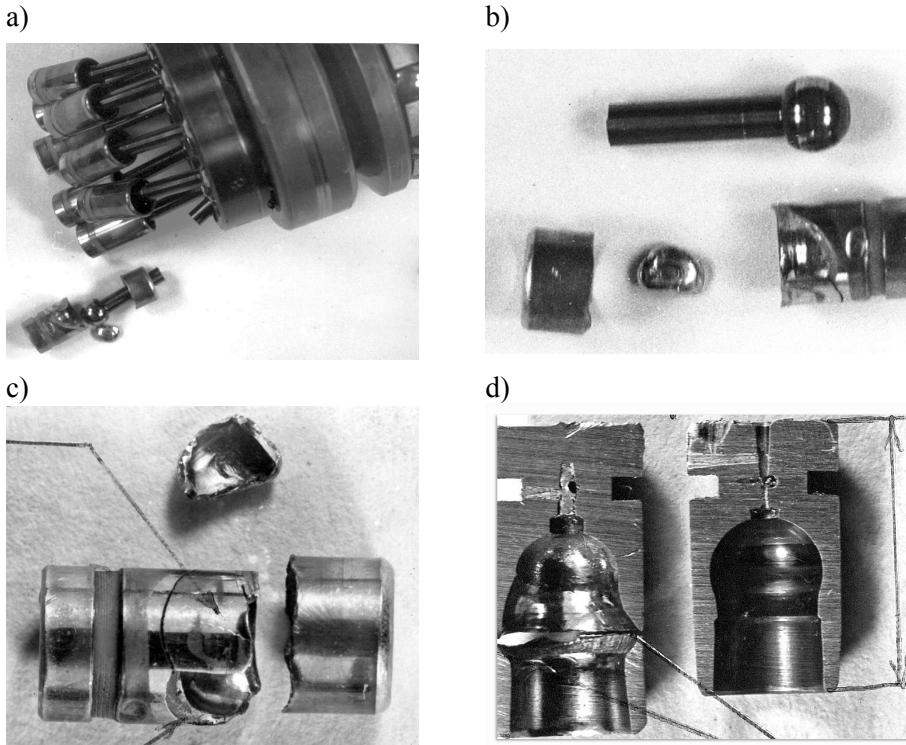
View of damaged elements of the hydraulic pump with a tilting cylinder block: a) forcing unit, b) piston and pusher, c) piston with a chip, d) elongated head of the piston pusher (left) and the comparative head (no damage, right)
